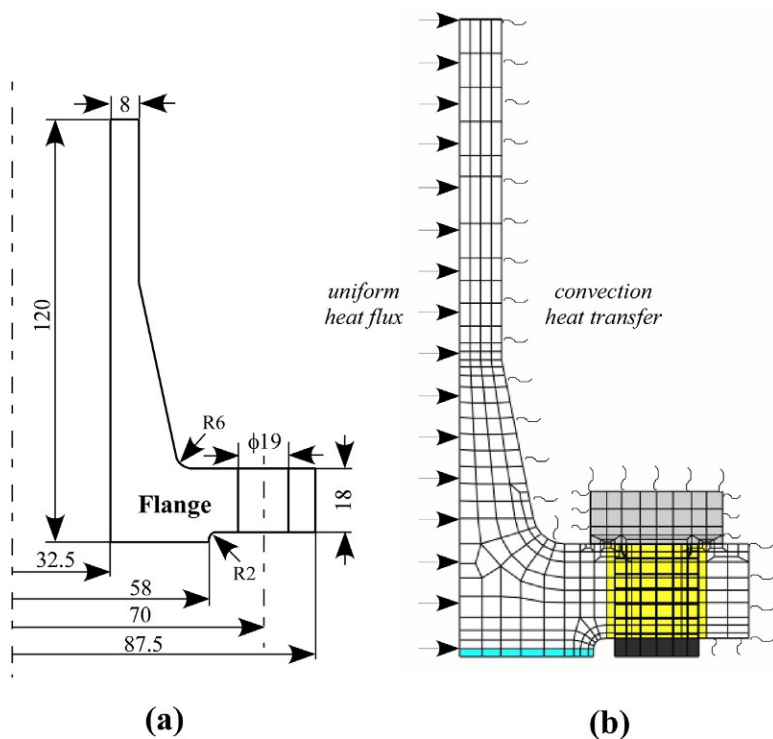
Detailed dimensions and axisymmetric FE model of target pipe flange. (A) Detailed dimensions and (B) FE model.
